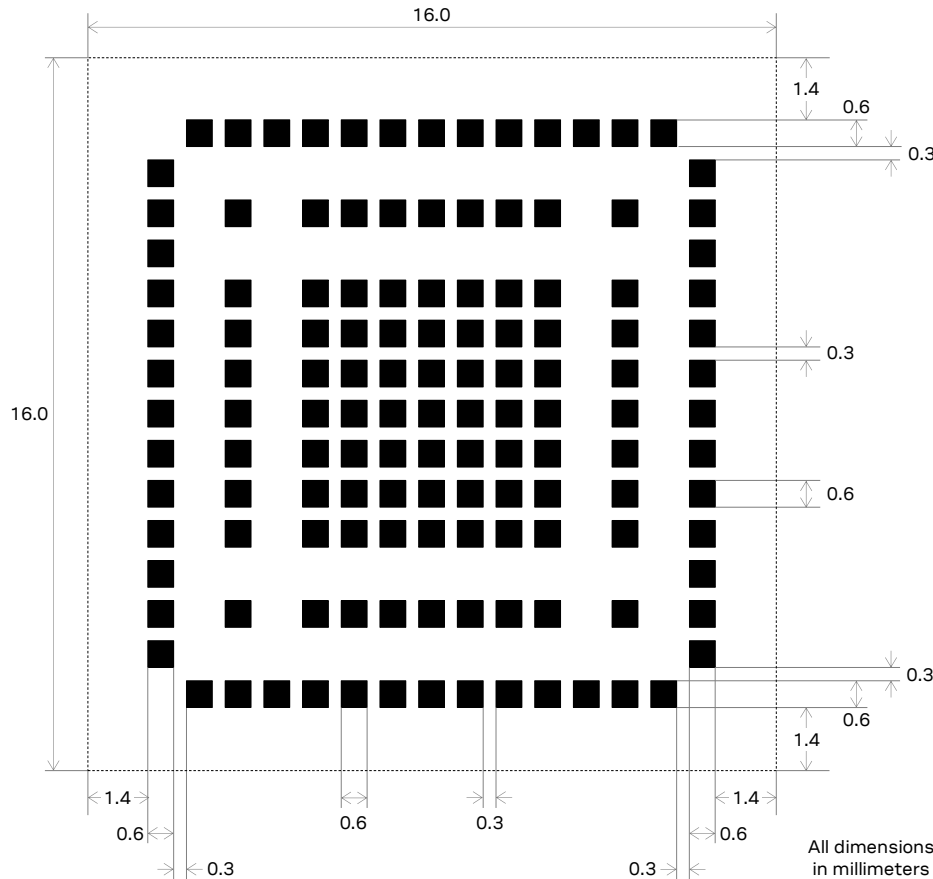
Suggested footprint and paste mask for LEXI-R10 series modules (application board top view)
